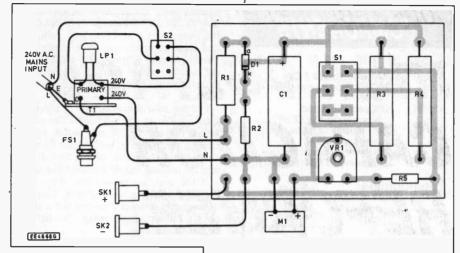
Component layout and wiring diagram for the HV Capacitor Reformer complete with safety interface. The p.c.b. copper foil track master is shown full size.
